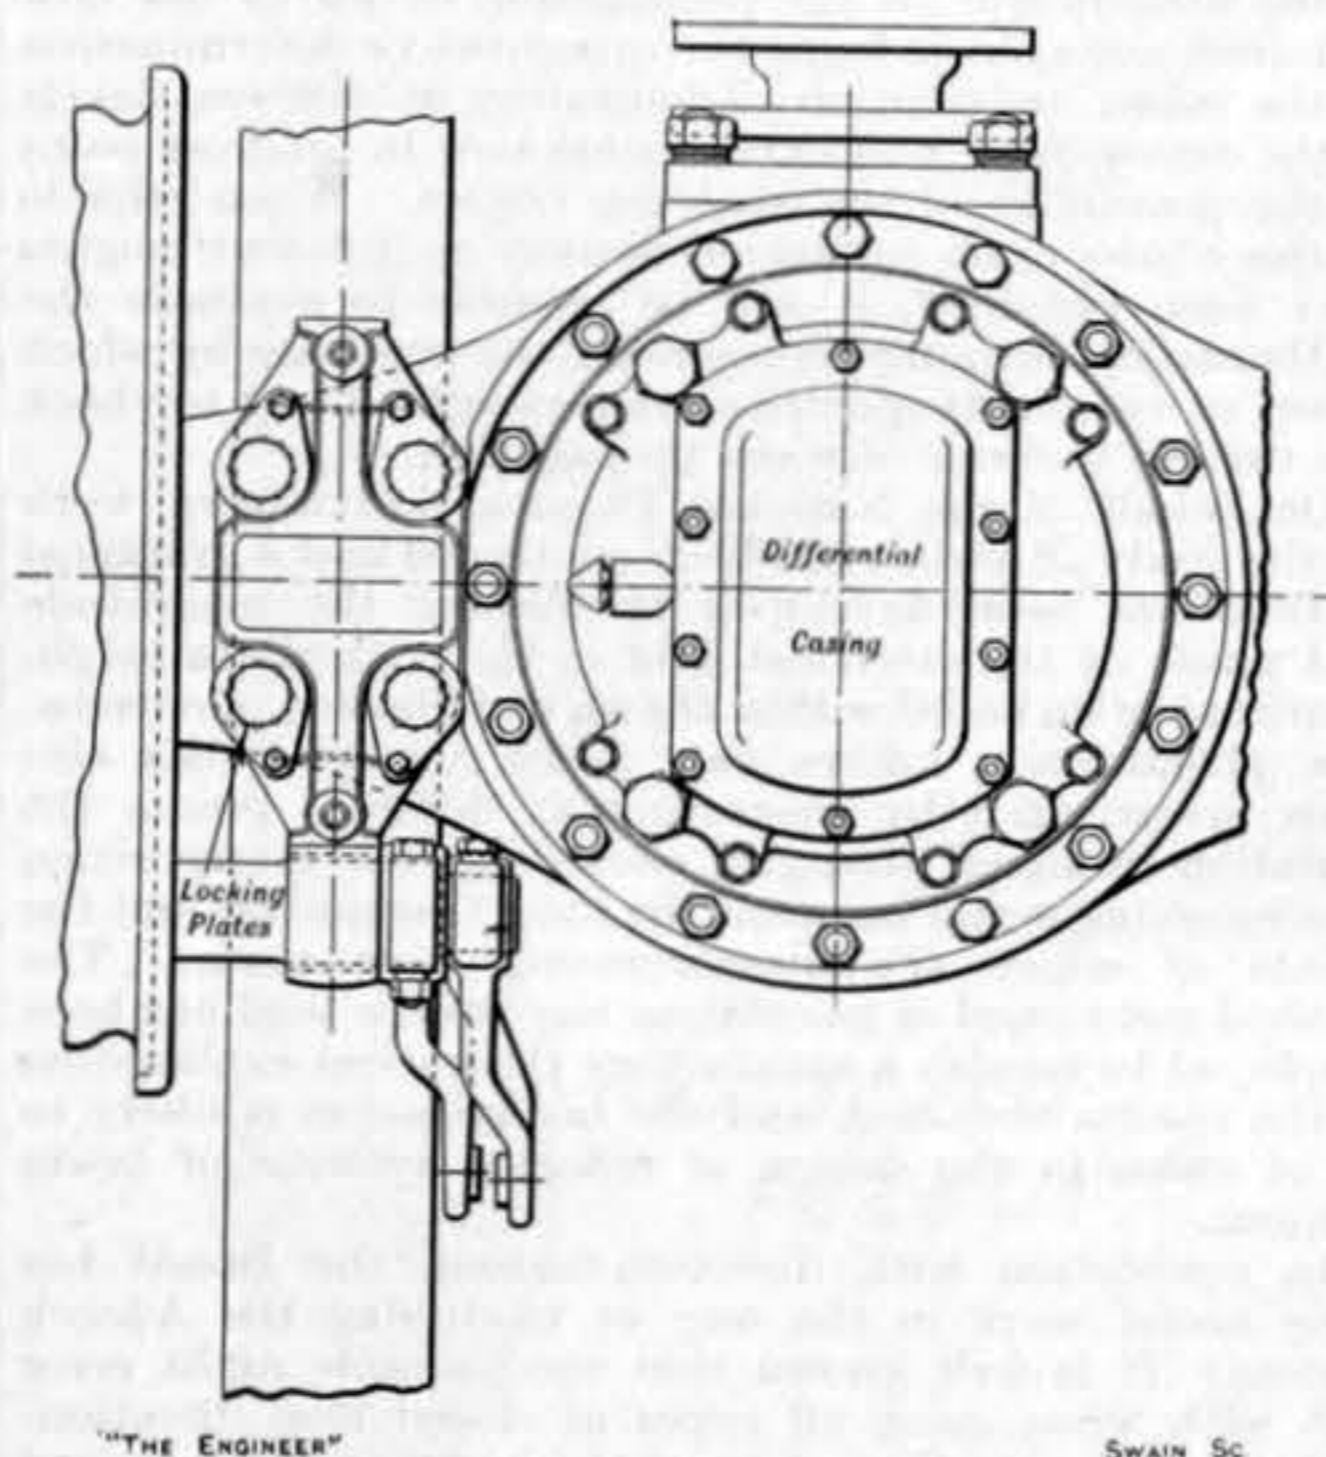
SPRING ASSEMBLY AND DIFFERENTIAL
